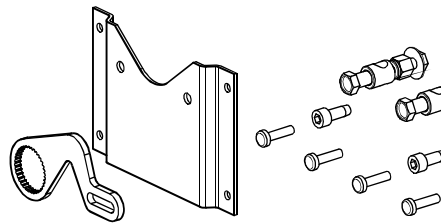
Rotary to Linear Crank Arm Kit with Mounting Bracket.
